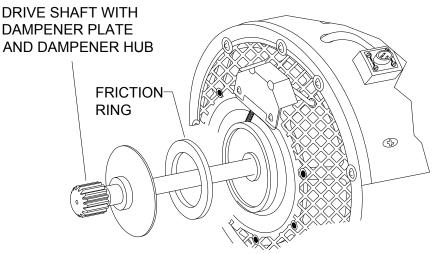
Drive Shaft with Dampener Plate and Dampener Hub
